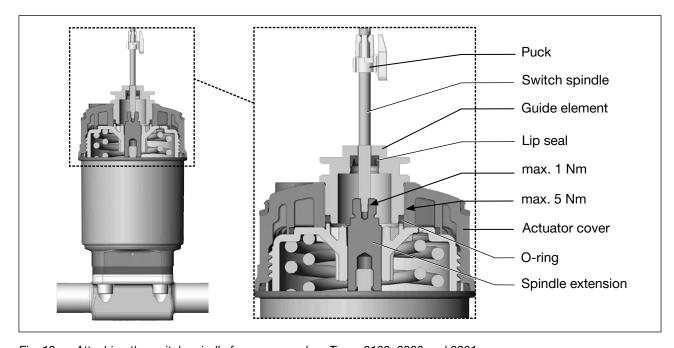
Attaching the switch spindle for process valves Types 2103, 2300 and 2301
